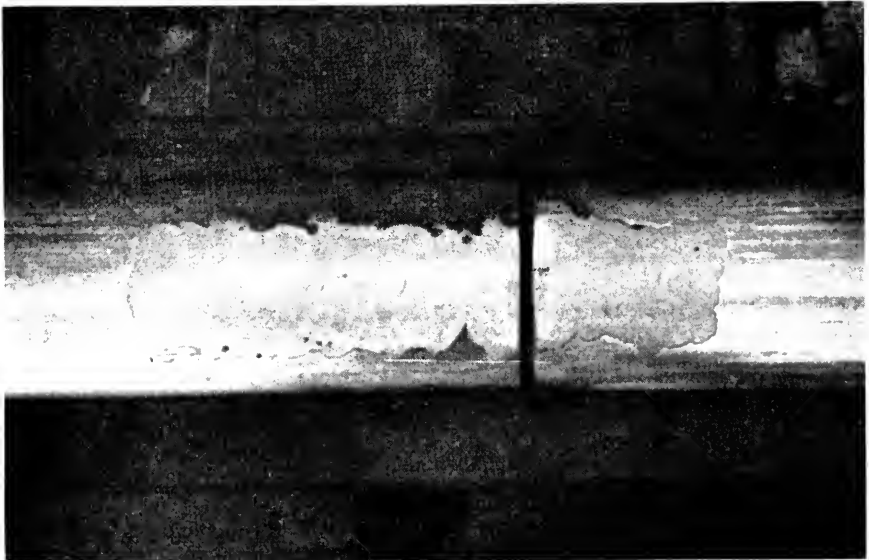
Photograph of joint 10 showing transverse cracks in the weld metal of both rails and longitudinal cracks in the weld metal of the west rail.
